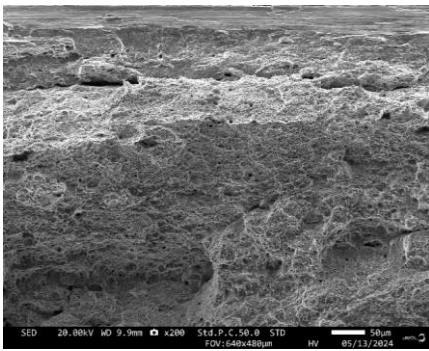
FAB-M2, near fracture surface, ductile, dimples.
